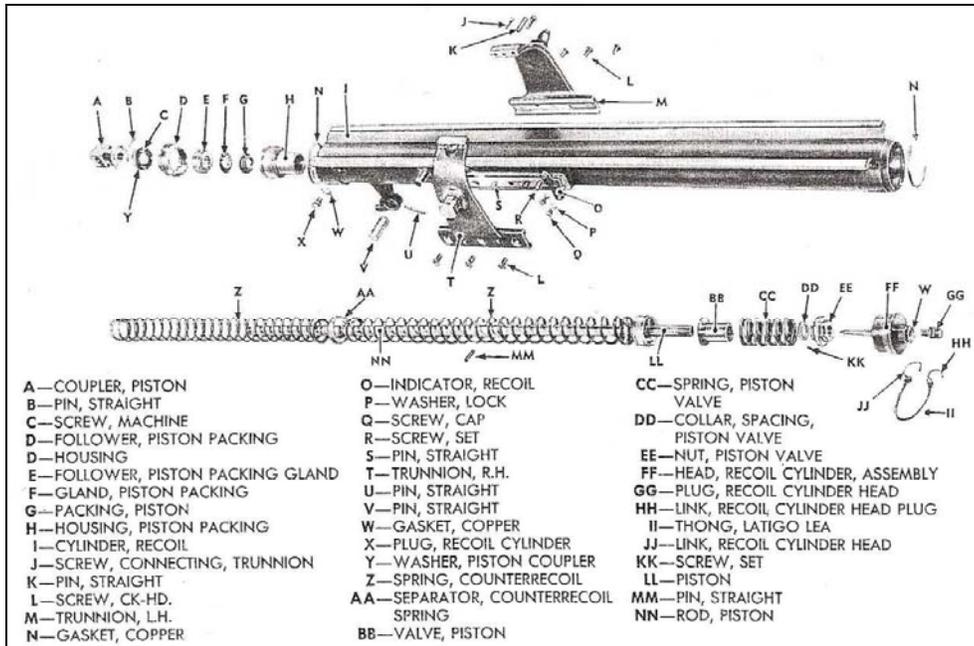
Exploded view of M4 recoil mechanism.<sup>1</sup>
